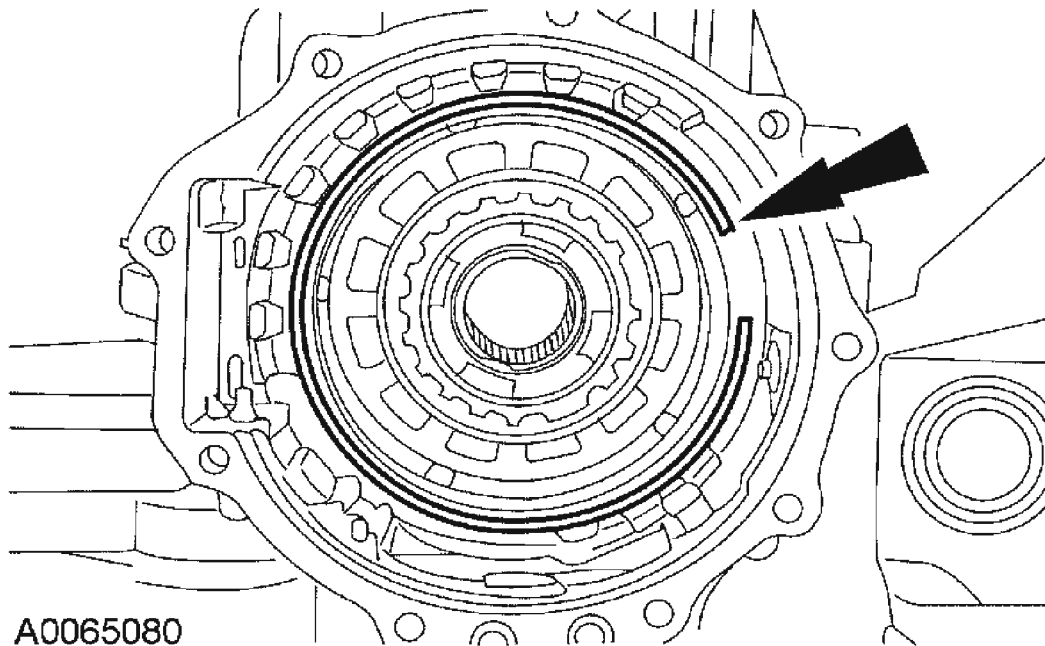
Installing Low Reverse Clutch Plate Selective Retaining Ring
